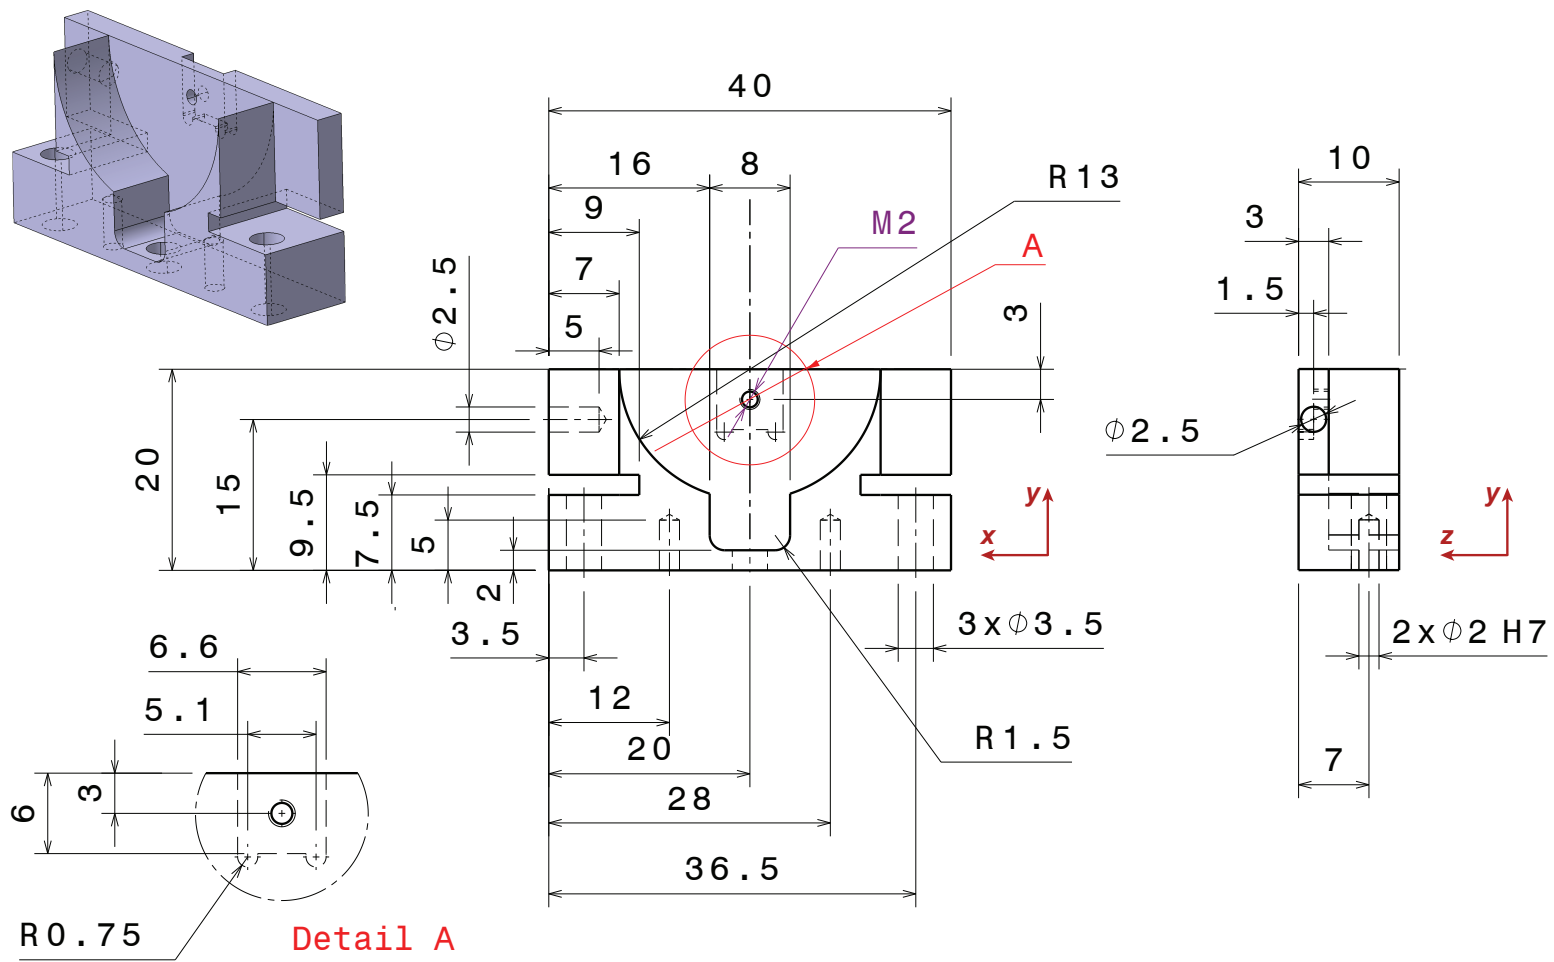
TA support: chip holder CAD. (Material: Brass)
